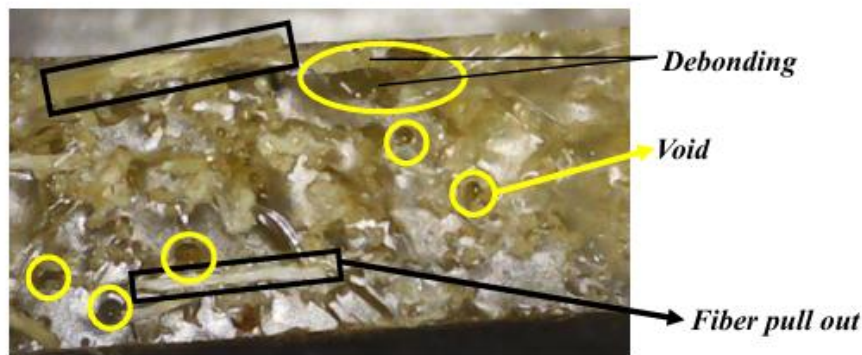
Macroscopic image of tensile fracture surface in sample E60.
